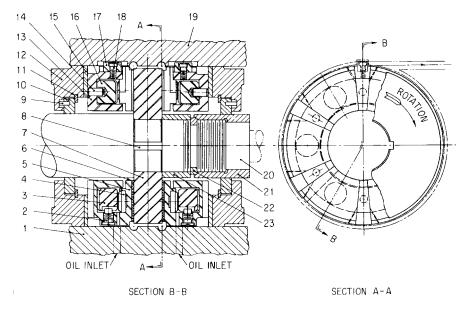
Section of tilting-pad thrust bearing. (1) Bearing bracket. (2) Leveling-plate set-screw. (3) Upper leveling plate. (4) Shoe support. (5) Shoe. (6) Shoe babbitt (4, 5, and 6 assembled as a unit). (7) Collar. (8) Key. (9) Pin. (10) Oil guard. (11) Snap ring. (12) Thrust-bearing ring. (13) Base ring (in halves). (14) Leveling-plate dowel. (15) Shim. (16) Lower leveling plate. (17) Base-ring key. (18) Base-ring key screw. (19) Bearing-bracket cap. (20) Shaft. (21) Outer check nut. (22) Retaining ring. (23) Inner check nut. (Source: Demag Delaval.)
